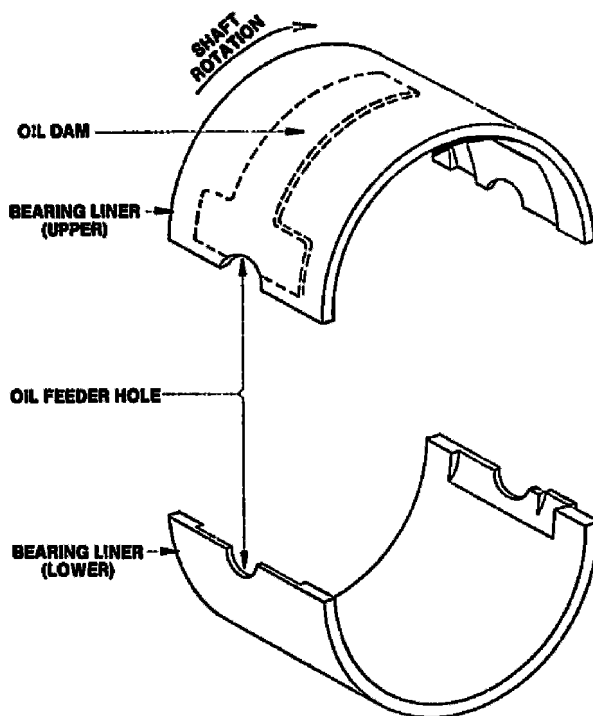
Pressure dam bearing. (Dresser-Rand Company, Olean, N.Y.)
